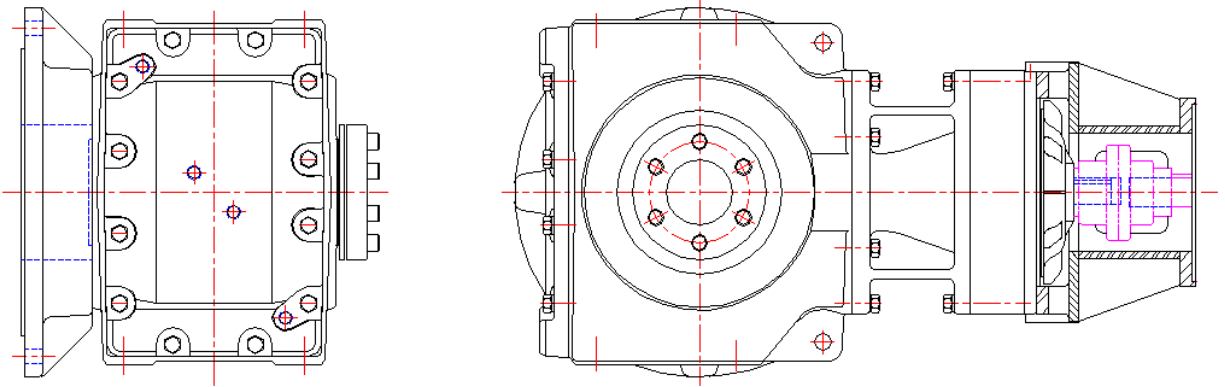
Flange-mount Bevel Buddy Box in horizontal position. Left: side view. Right: back view.
